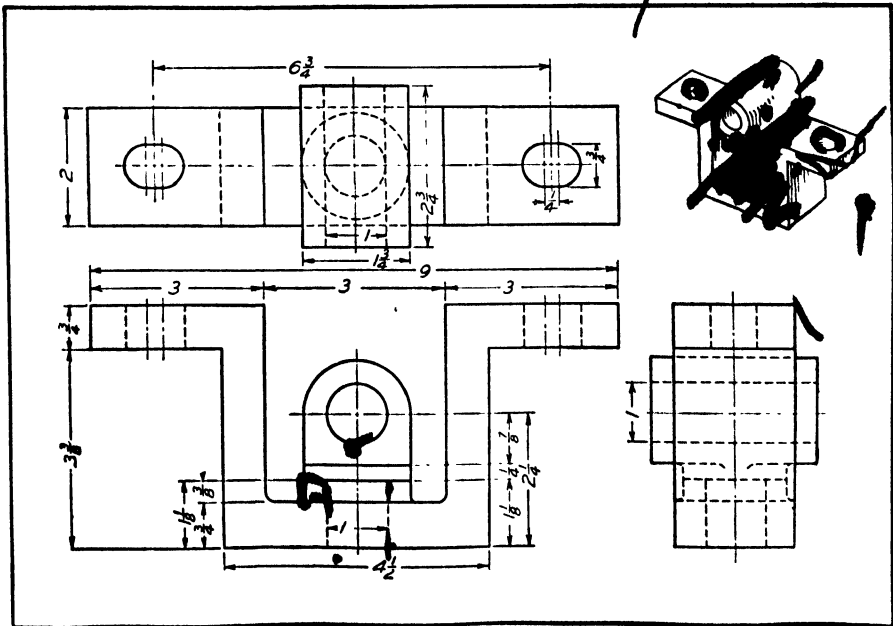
Prob. 150. Draw three views of the *swivel hanger*, the side view to be a section. There are two pieces, the hanger and the bearing.
